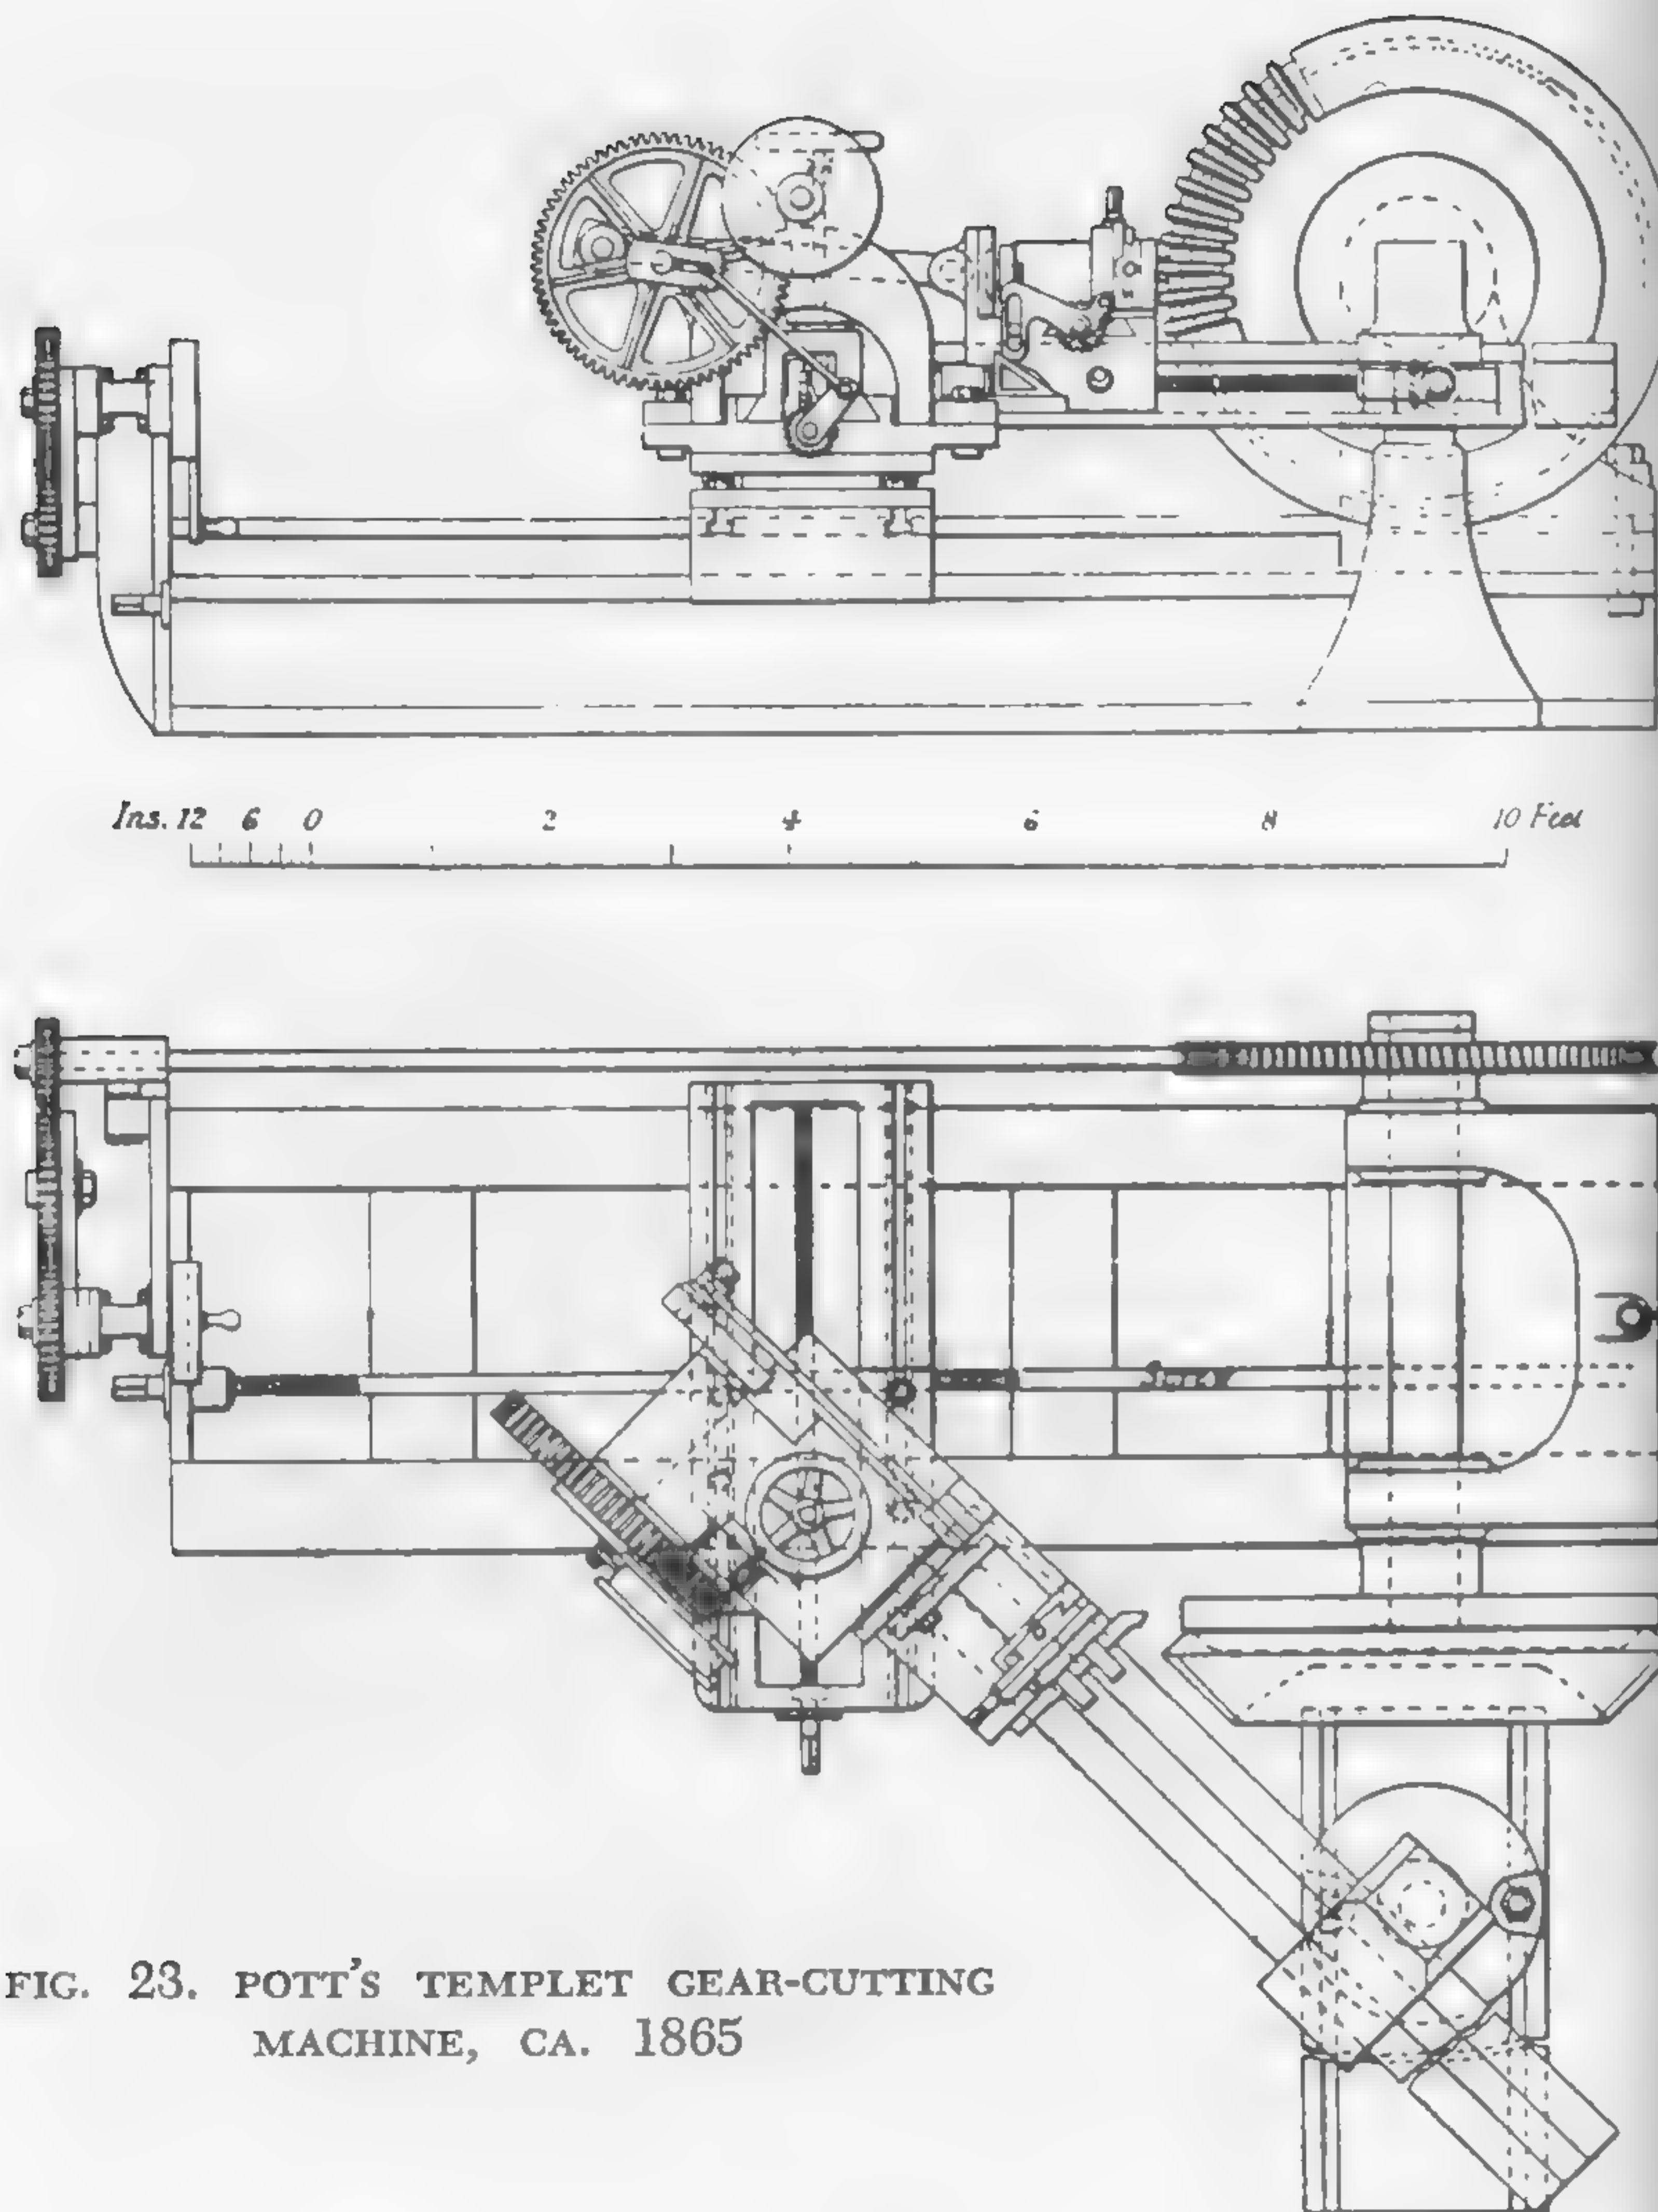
POTT'S TEMPLET GEAR-CUTTING MACHINE, CA. 1865
